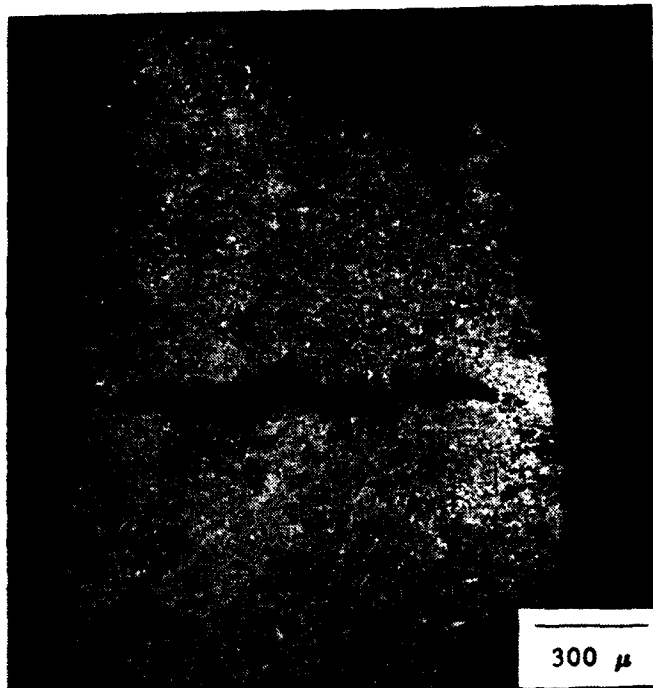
Transverse fracture surface of a failed stress rupture specimen as-ROC'ed, showing no longitudinal cracks.
